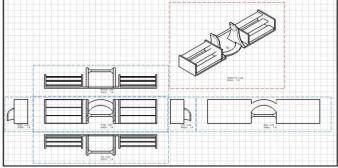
Assembly – Zero Angle of Attack – Different Views
